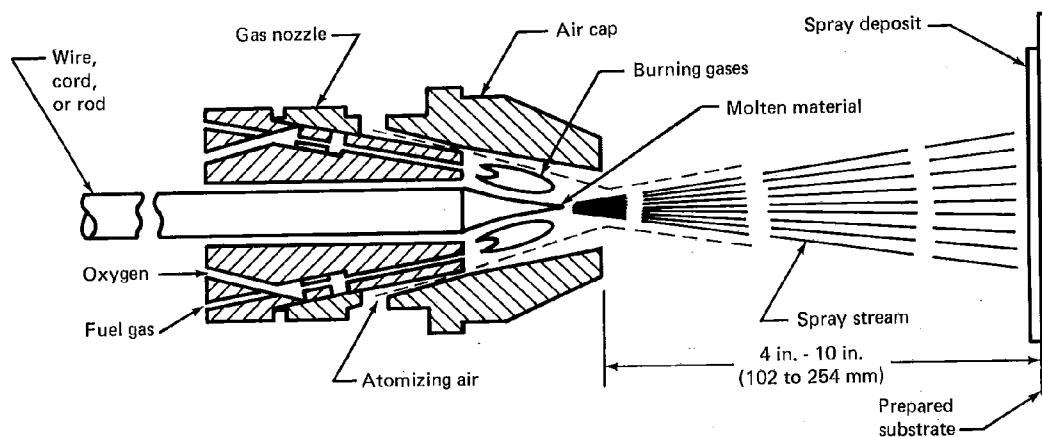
B — Cross section of typical wire rod or cord flame spray gun
